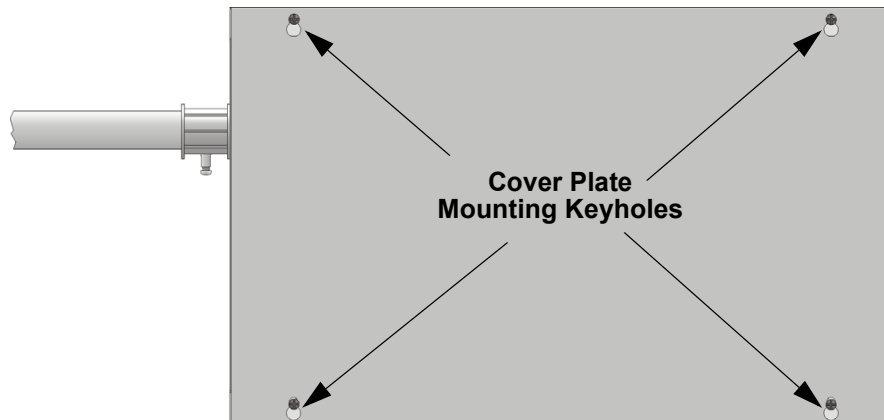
Cover Plate Mounting Keyholes and Cover Mounting Screws Alignment
